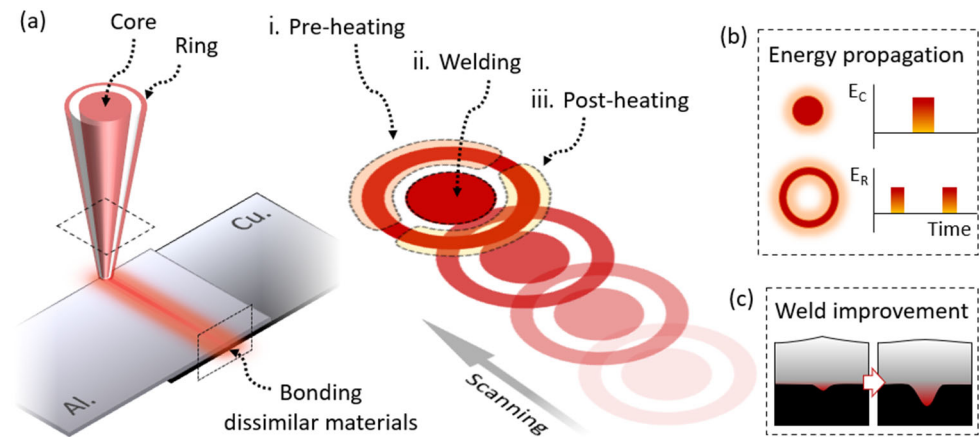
Principle of the idea (a) dual-beam laser welding for dissimilar materials (b) Energy propagation of the Ring Beam Modulation-assisted Laser Welding (c) Weld reliability improvement through ring laser.
